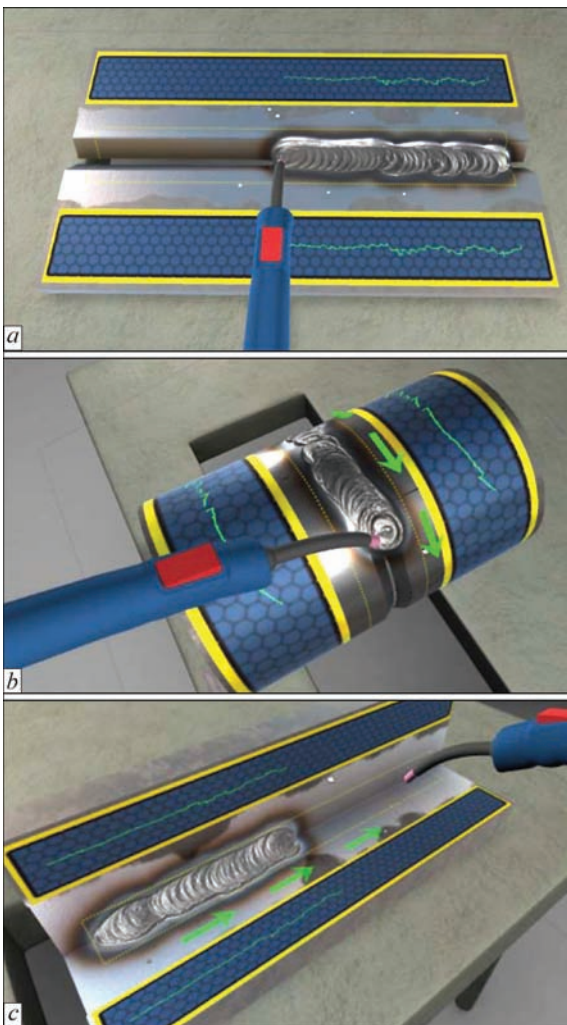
Virtual MIG/MAG welding in V60 trainer: *a* — butt weld in the downhand position; *b* — orbital welding of position butt weld; *c* — fillet weld
